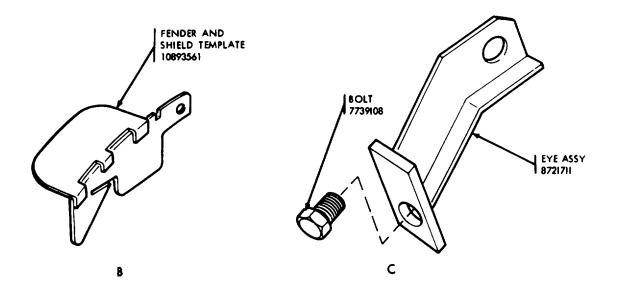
Templates and fixtures (sheet 1 of 2).
